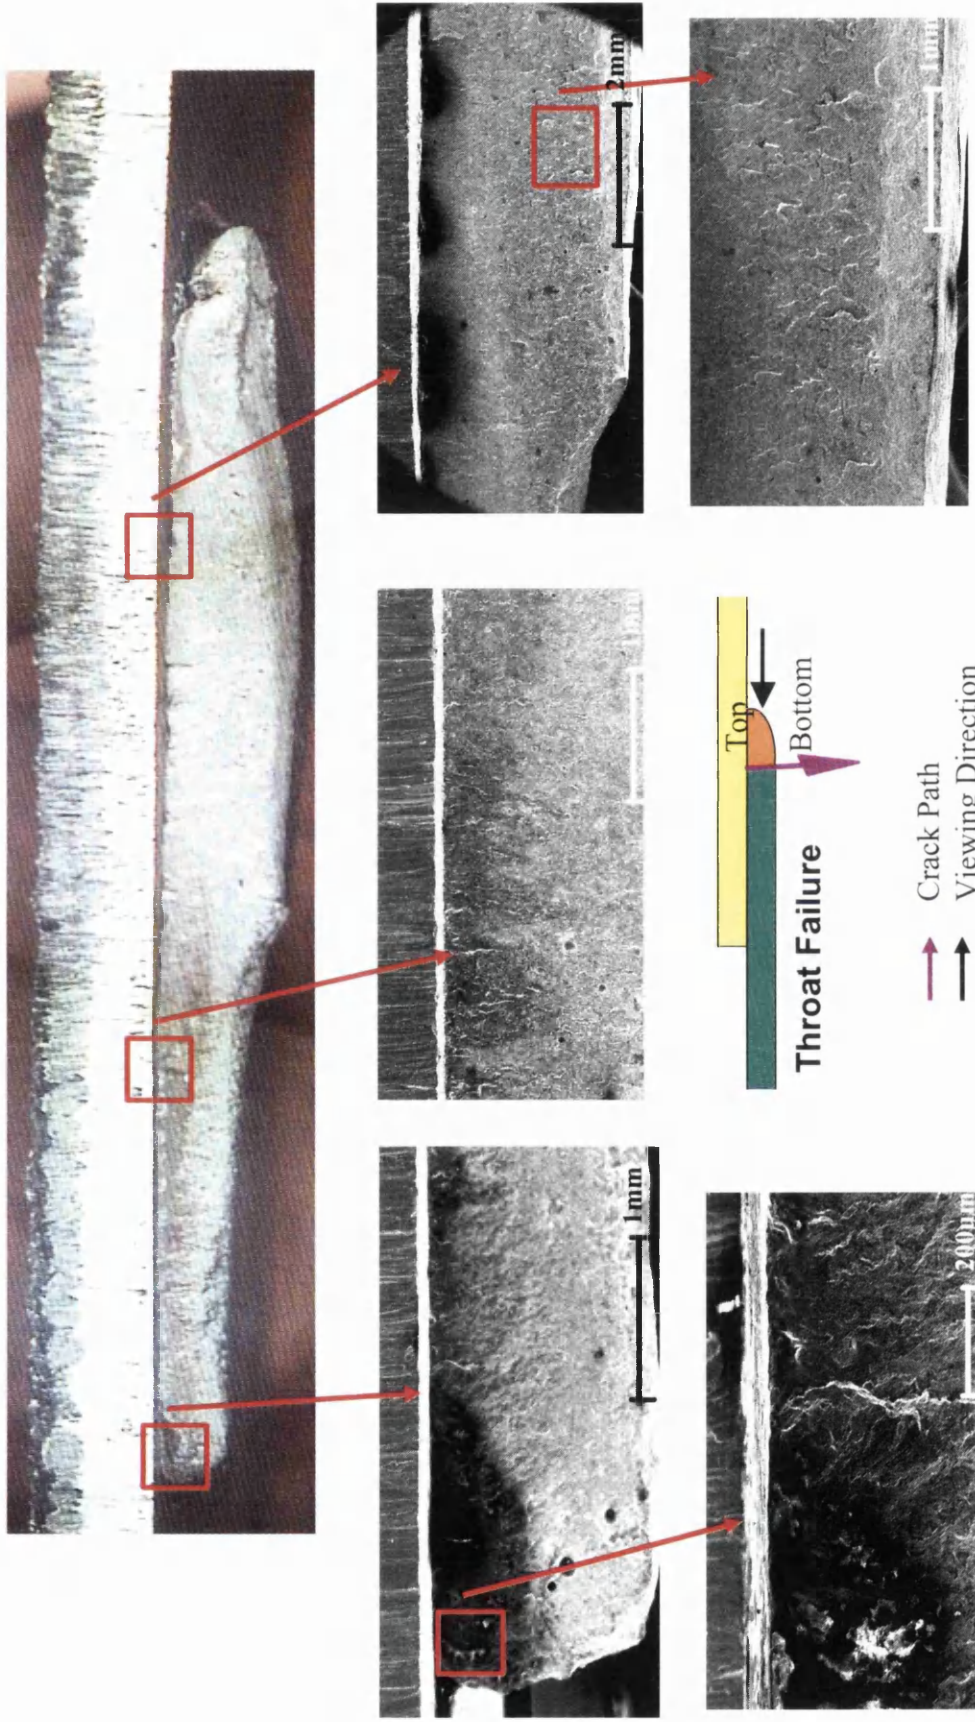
Typical Fracture Surface for TM1 Weld Throat Failure – Weld View
